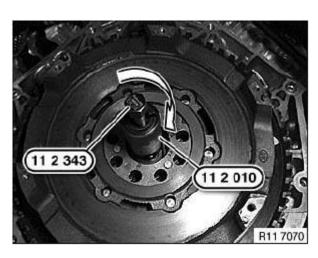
Twisting Out Roller Bearing Using Special Tool (11 2 343) Courtesy of BMW OF NORTH AMERICA, INC.
